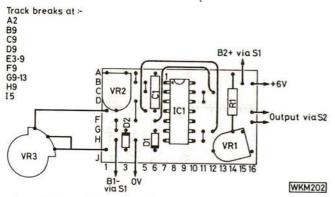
The layout of the components on a piece of Veroboard. A socket should be used for the c.m.o.s. integrated circuit
